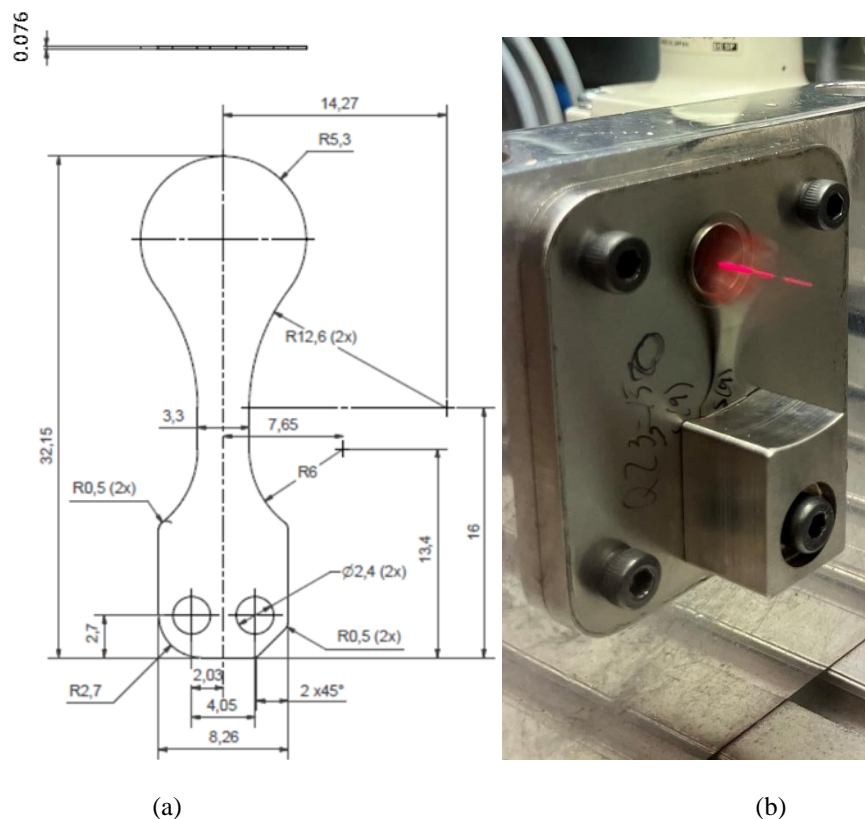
a) The geometry and dimensions of the ultra-thin reed valve specimens tested in this study, (b) an ultra-thin reed valve tested without a retainer against a steel valve plate in the impact fatigue test system at voestalpine Precision Strip AB.
